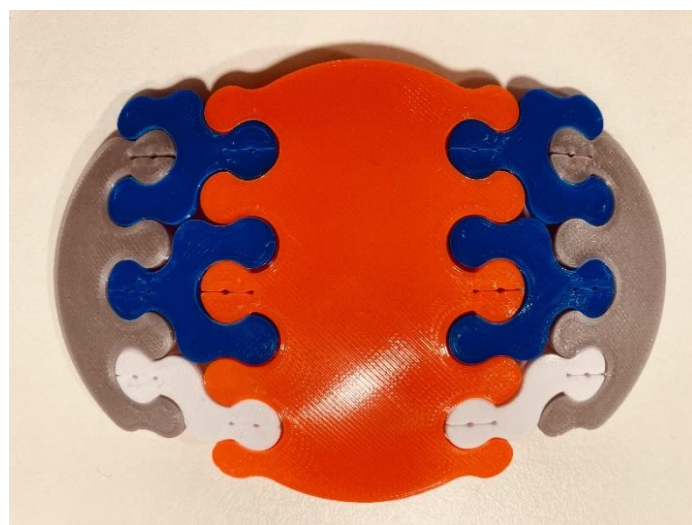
The PLA Armadillo set assembled into the PLA prototype of the modular cranial semi-PSI.
